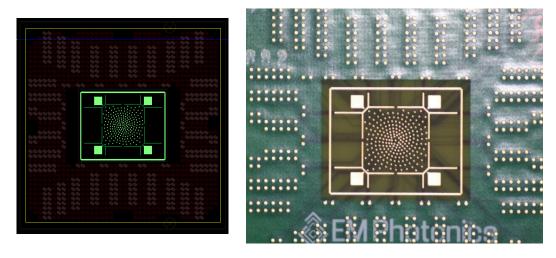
A design rendering of the Detector Interposer PCB (left) next to a photo of the physical PCB (right). Input channels are routed from the spiral at the center of the PCB to exposed pads on the PCB underside which are also exposed for probing on the top
